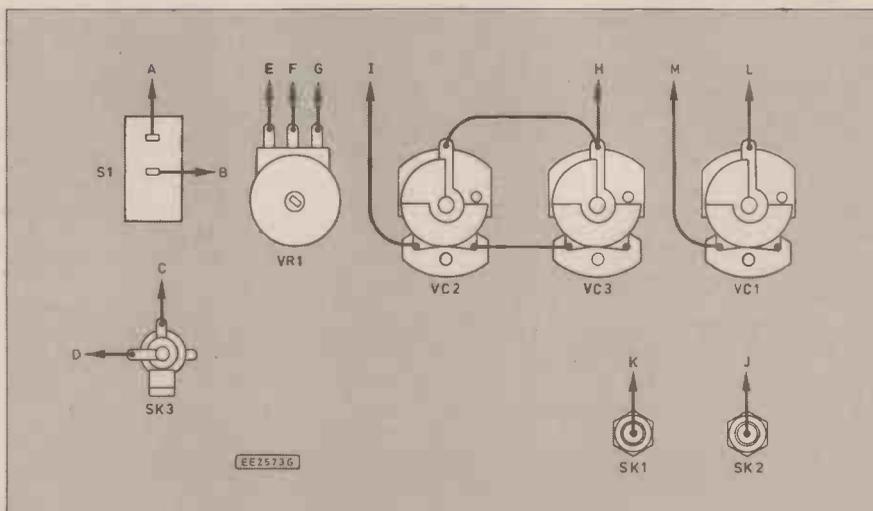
Wiring details from the front and rear (SK1/SK2) panel mounted components to the circuit board (Fig. 4). Join A to A, B to B, and so on.
